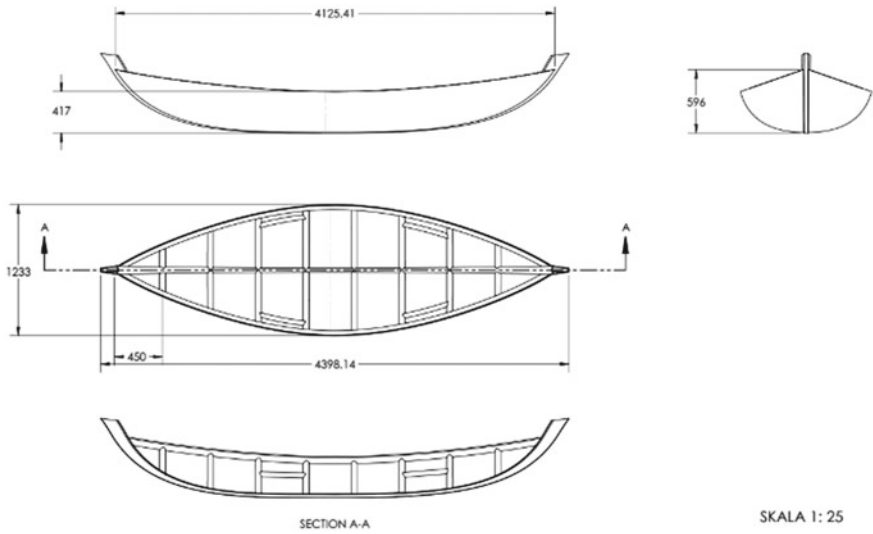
Jaloe Kayoh dimensions (mm) [17]
